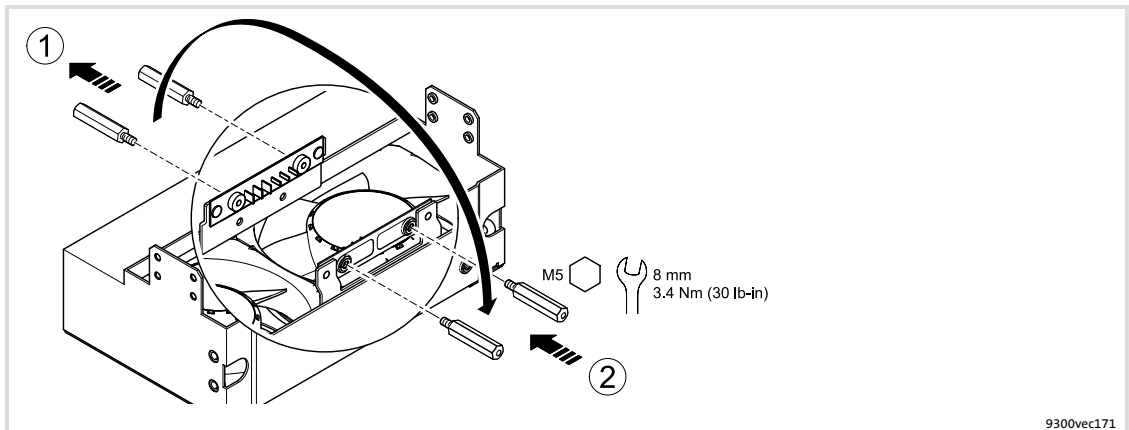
Modifying the threaded sleeves for the voltage supply of the fans
